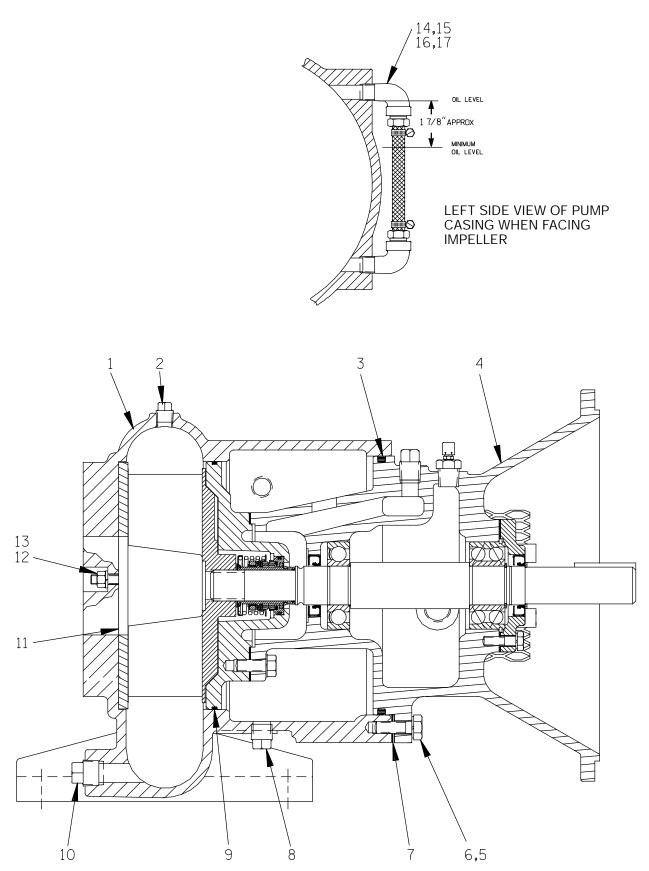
64C60-(SAE4/10) And 64C60-(F3L 1011) Pump End Assembly
